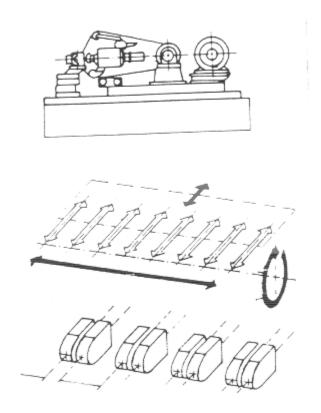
Multi Station Belt Grinding Machine's Schematic Layout (Parallel layout)
